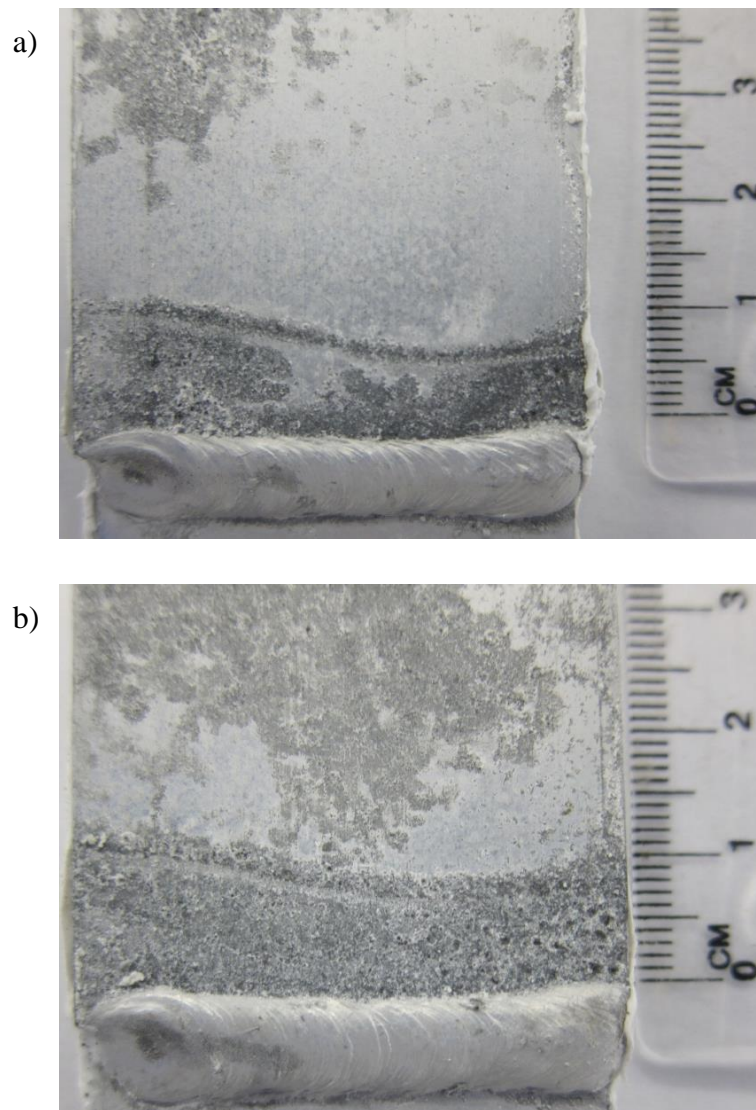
Close-up images of duplicate samples of lap-joint welded configuration A1 (ER5356/AA7003/L) in the as-welded T6 condition.
